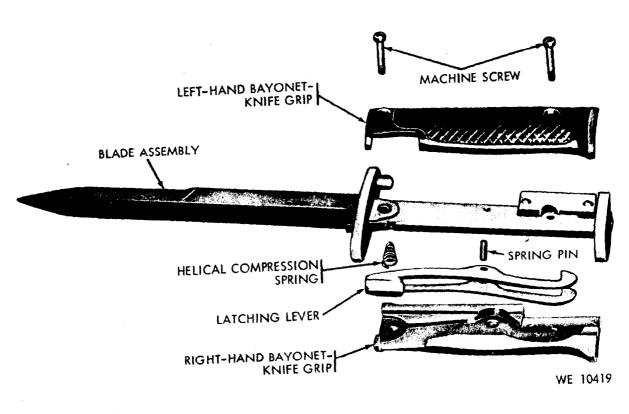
Disassembly/assembly of bayonet-knife M5.
